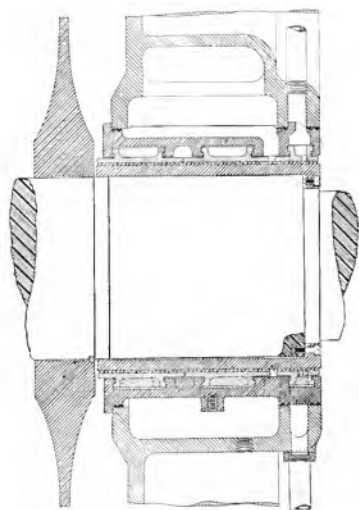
Assembly of High-pressure Head-end Labyrinth-type Shaft Packing
